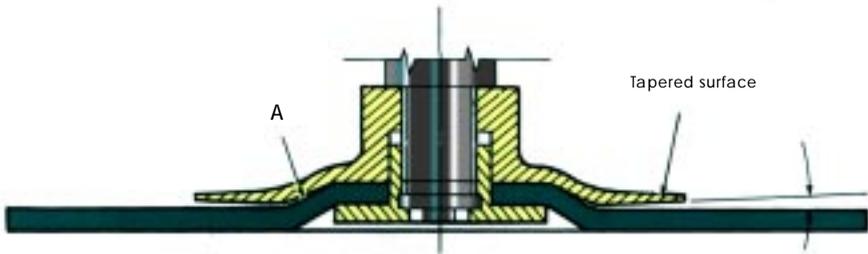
Flange assembly for a depressed-centre wheel. The outer part of the flange adjacent to the wheel should be tapered as shown and there should be a slight clearance at A.
